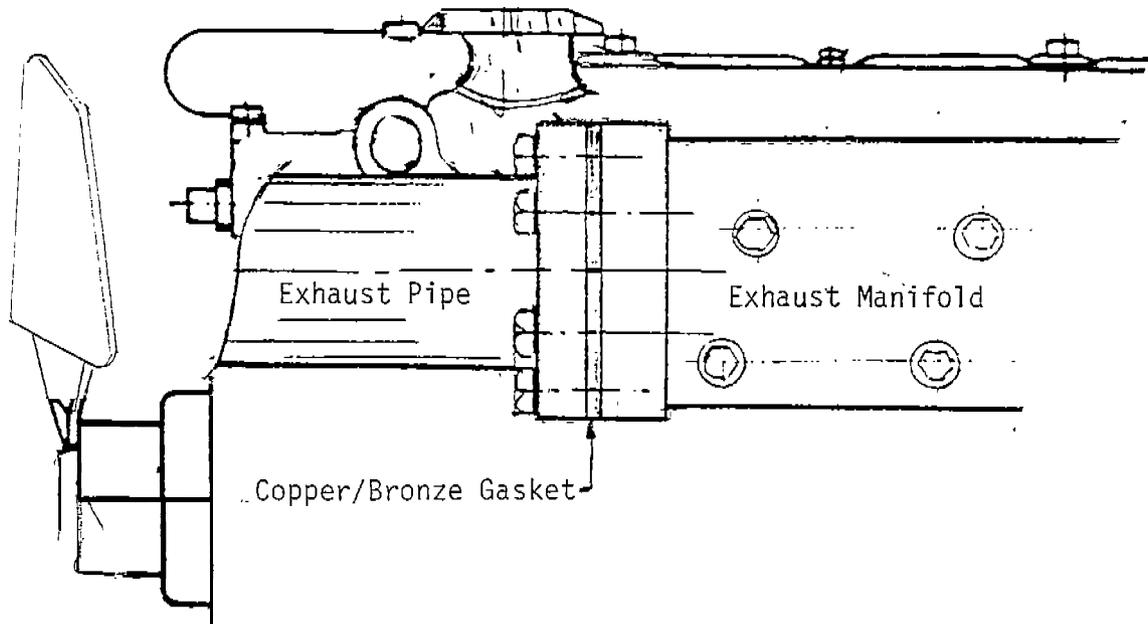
Gasket Between Exhaust Pipe and Exhaust Manifold Flange
